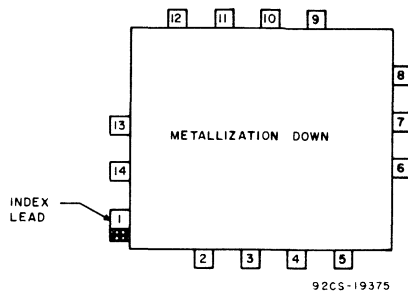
Terminal layout for CA3018L (14-lead configuration)
